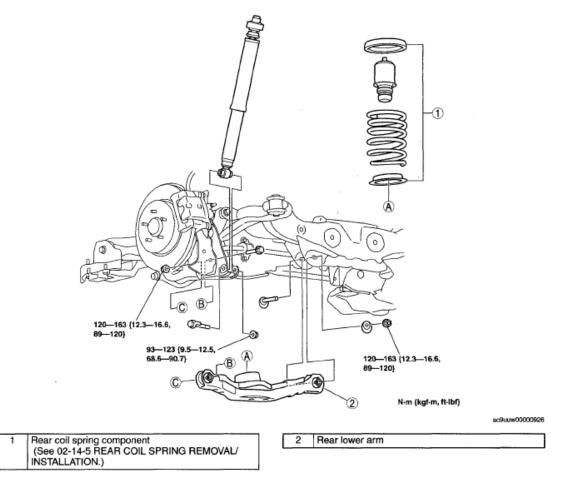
Identifying Rear Lower Arm Components & Torque Specifications Courtesy of MAZDA MOTORS CORP.
